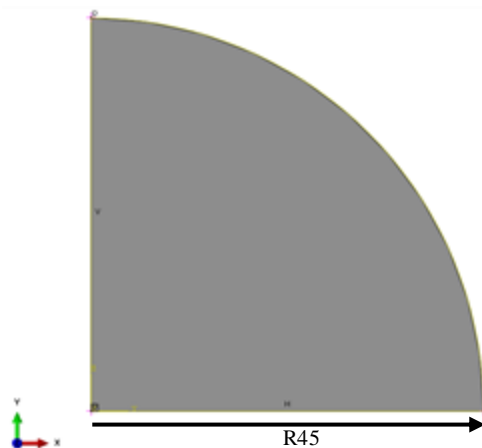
Sheet blank surface modelled in FEA (dimensions in mm)
